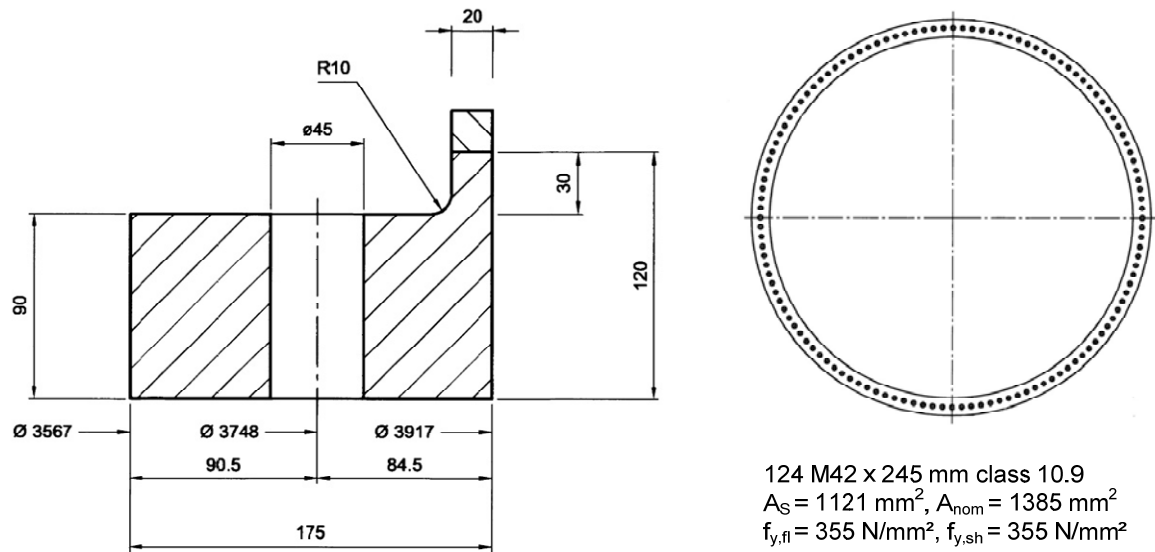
Flange 1 - Dimensions and material properties of upper flange in tower joint 1
